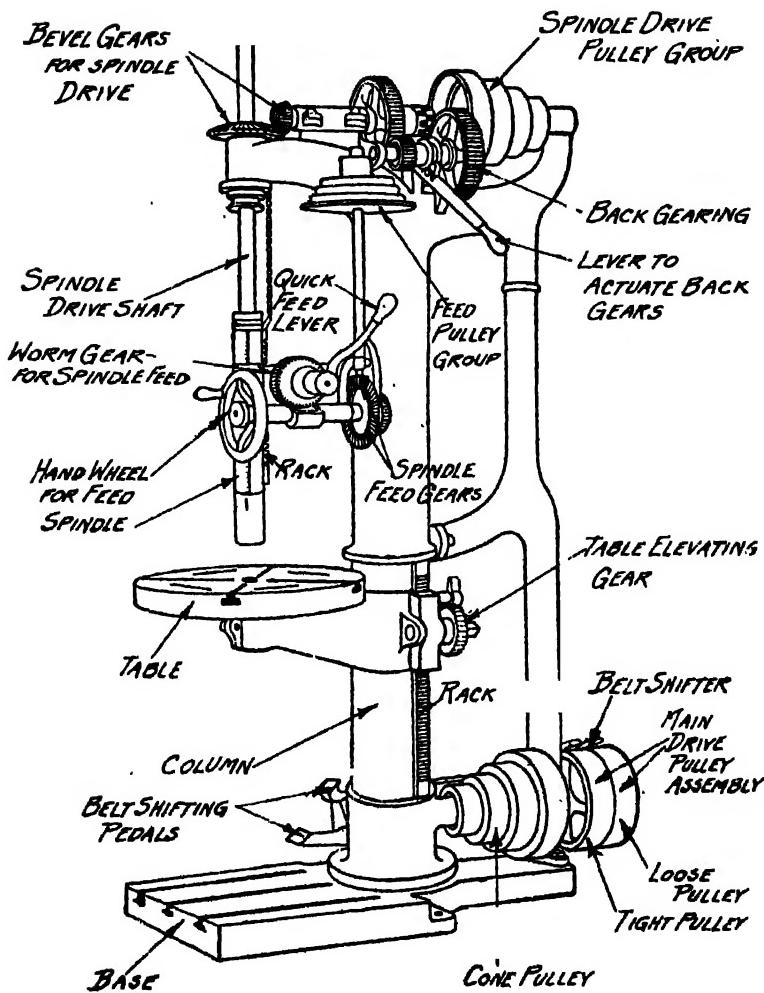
Medium Size Back Geared Upright Drilling Machine.
